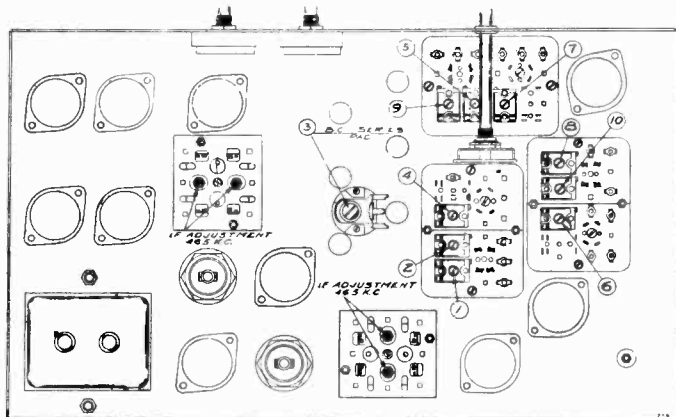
BOTTOM VIEW SHOWING TRIMMERS
